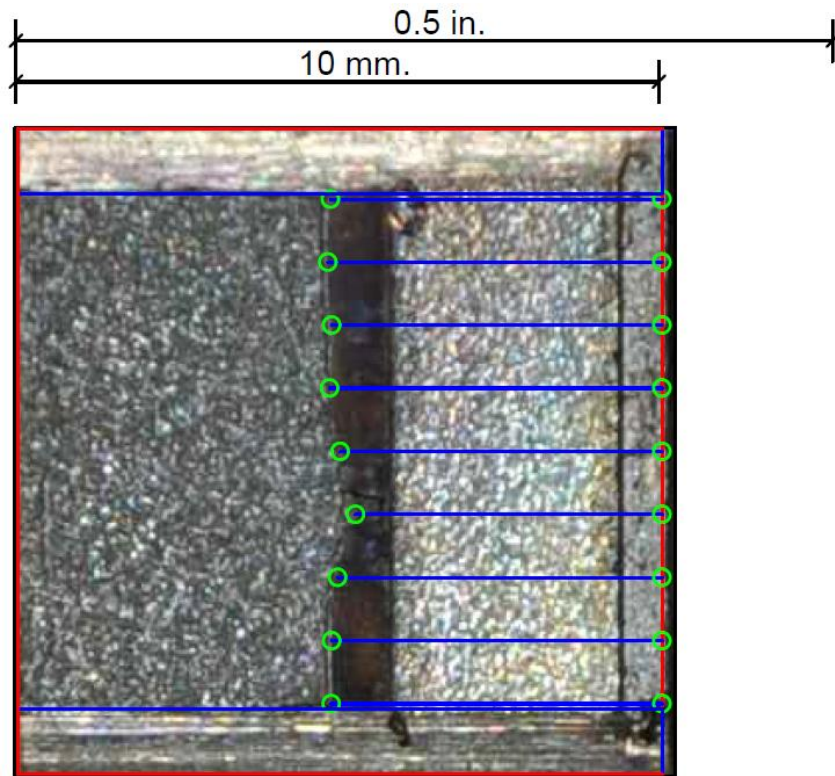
Specimen J6' Fracture Surface
